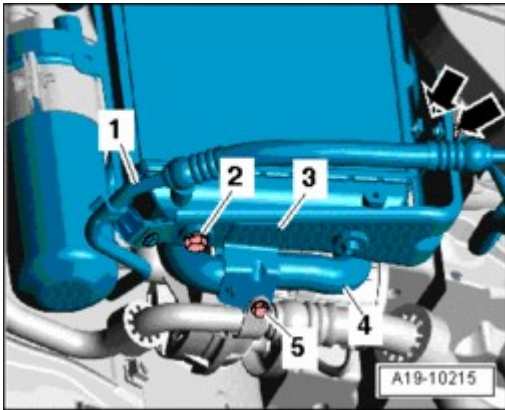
Removing Lower Mount Bolt, Refrigerant Line Retaining Clip At Right Auxiliary Cooler Mount & Disengaging Refrigerant Line And Coolant Line From Brackets
